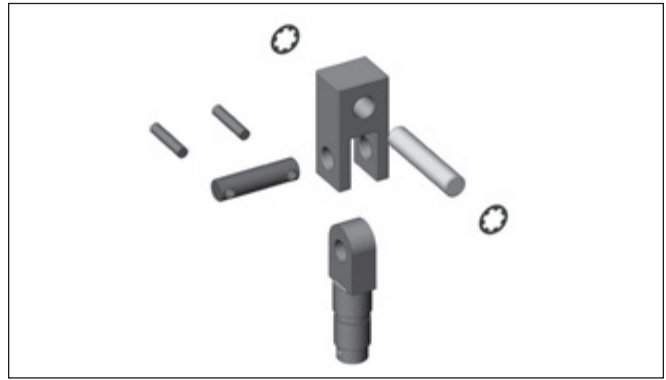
3 Ton (3000 kg) Hoist to Trolley Assembly
